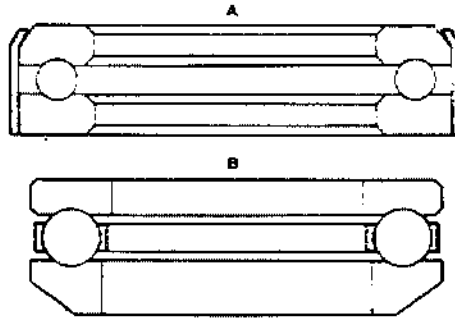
BANDED THRUST BALL BEARING, A, AND ALIGNING, SINGLE-ACTING, GROOVED-RACE THRUST BALL BEARING, B.
